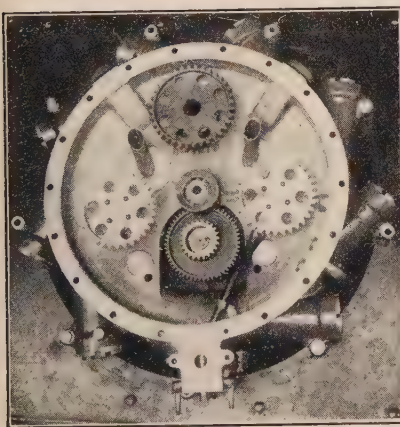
Blower section of the supercharger, showing the gears in the front chamber for driving auxiliary machinery.
